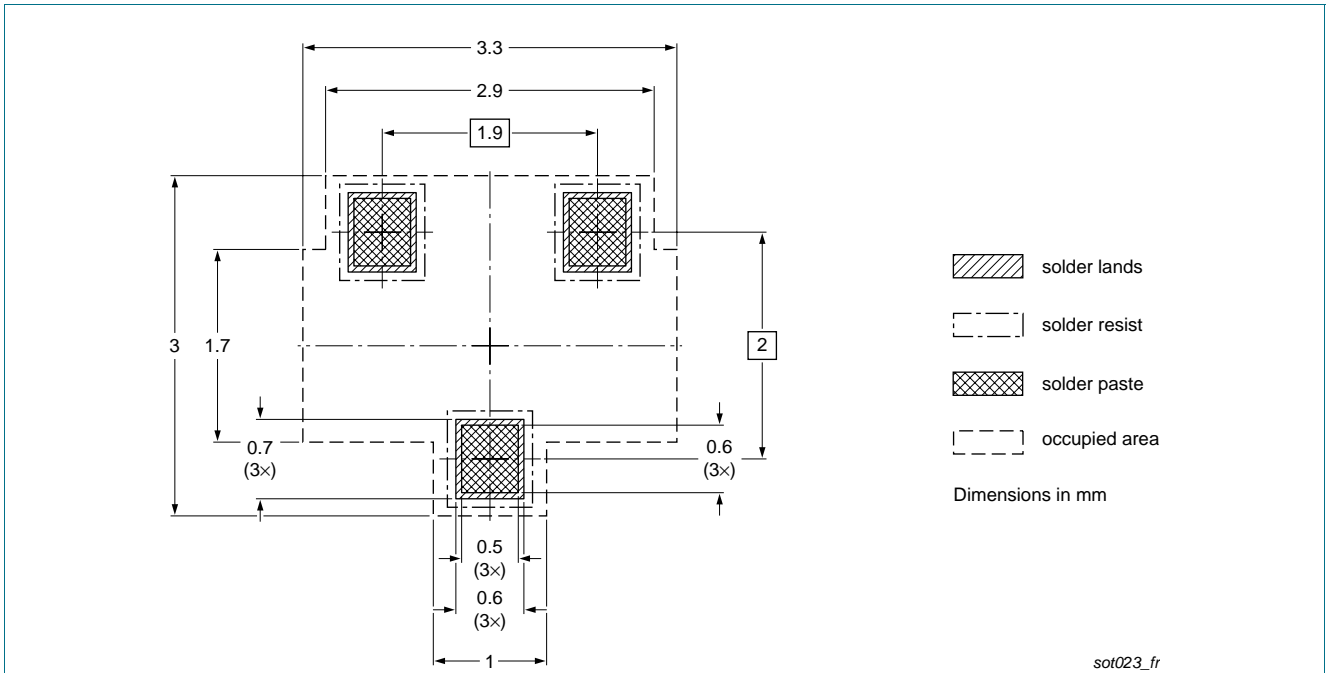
Reflow soldering footprint for SOT23 (TO-236AB)
